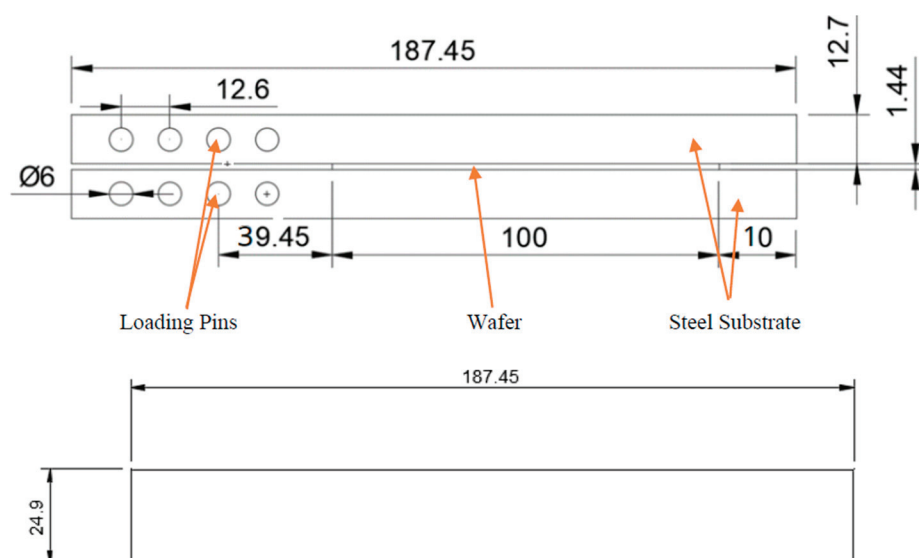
Illustration of the dimensions of the DCB (all dimensions are in mm).
